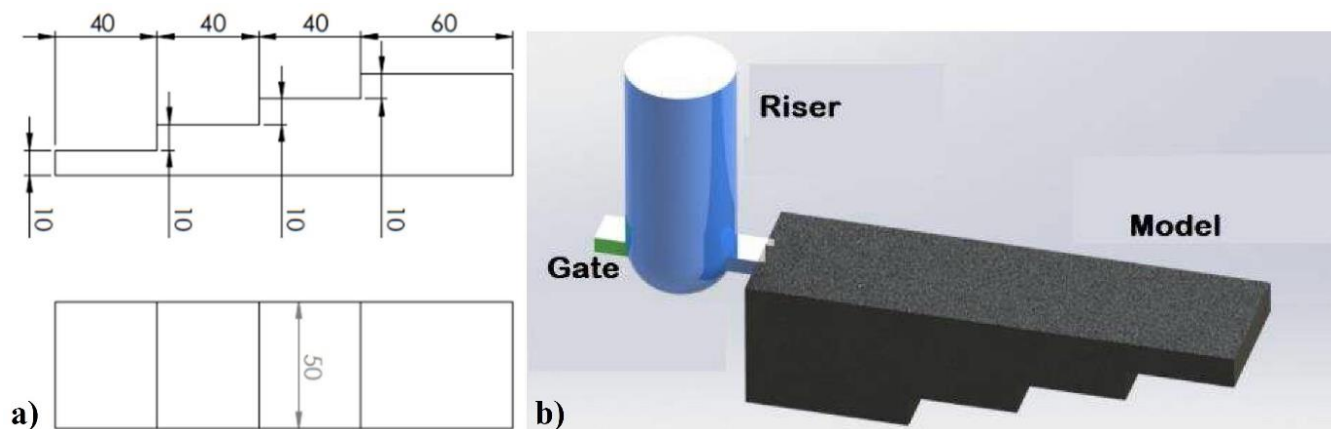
a) geometry and dimension of the cast part, b) solid model image
